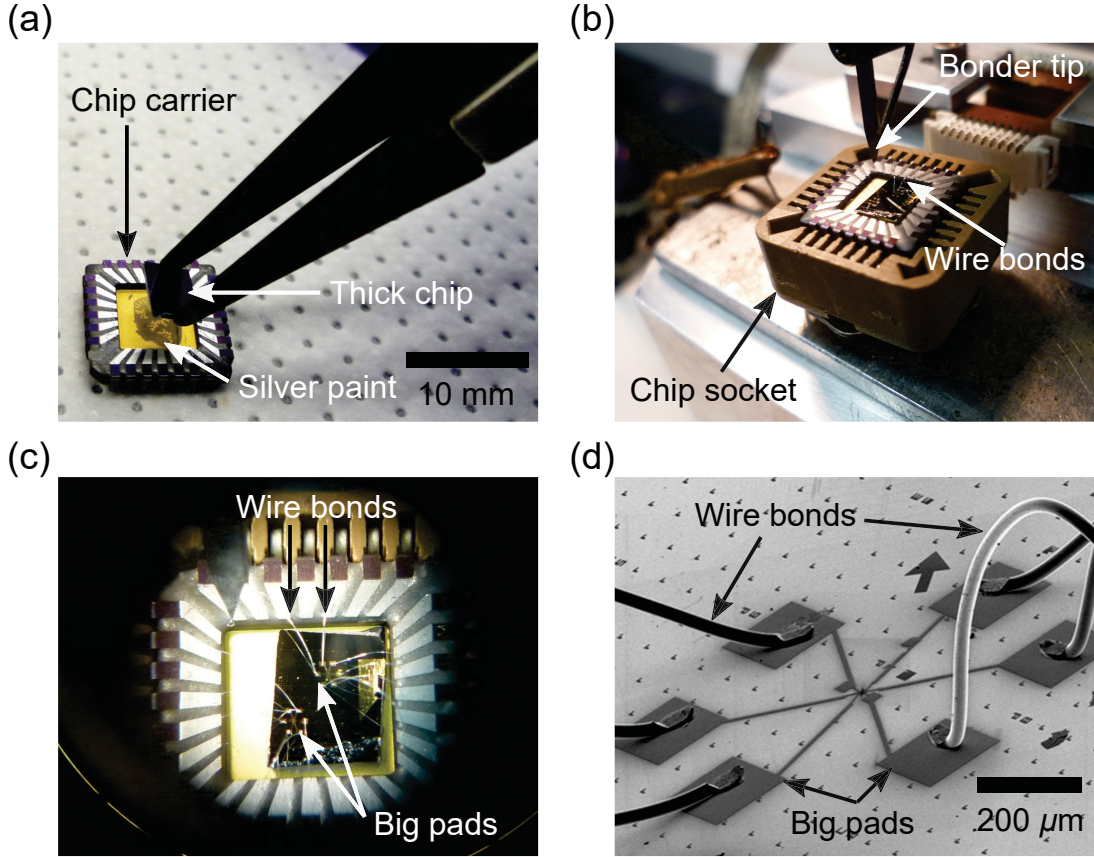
Wire bonding and loading SWCNT devices. (a) Installing a thick chip on the chip carrier using silver paint. (b) The loaded chip carrier in a grounded chip socket for wire bonding. Al wire bonds and the bonder tip also shown. (c) Close-up view of the Si chip, with big pads from the 6-point pattern visible and bonded to the chip carrier. (d) Tilted SEM image of the wire bonds attached to the six point pattern. Image courtesy of Vahid Tayari.
